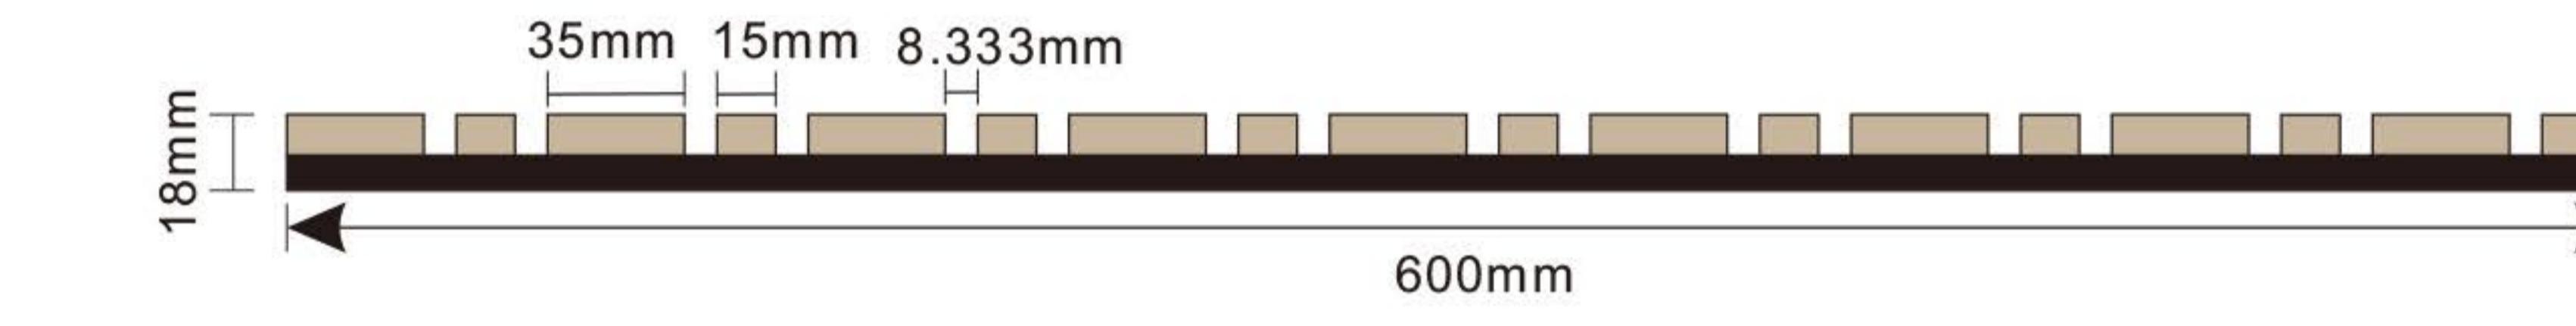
DETAILED DRAWINGS OF PRODUCT DIMENSIONS
